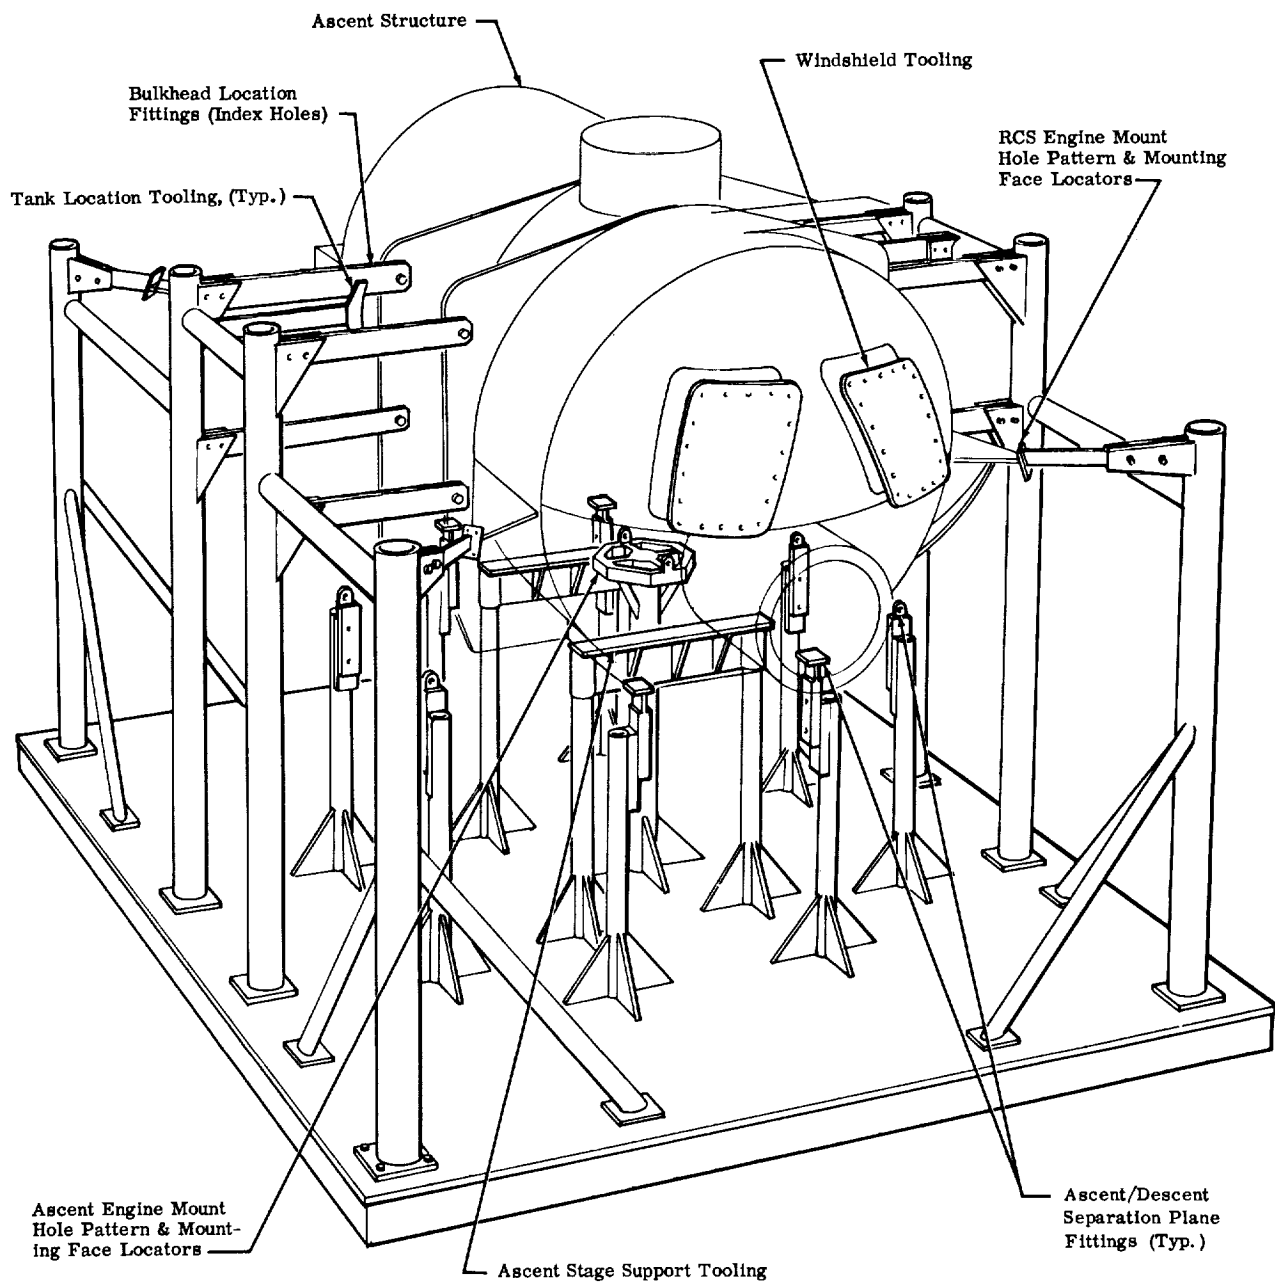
Final Structural Assembly Fixture - Ascent Stage
